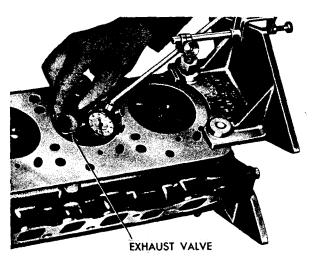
Installing Sleeves To Check Guide Clearance (Typical)
